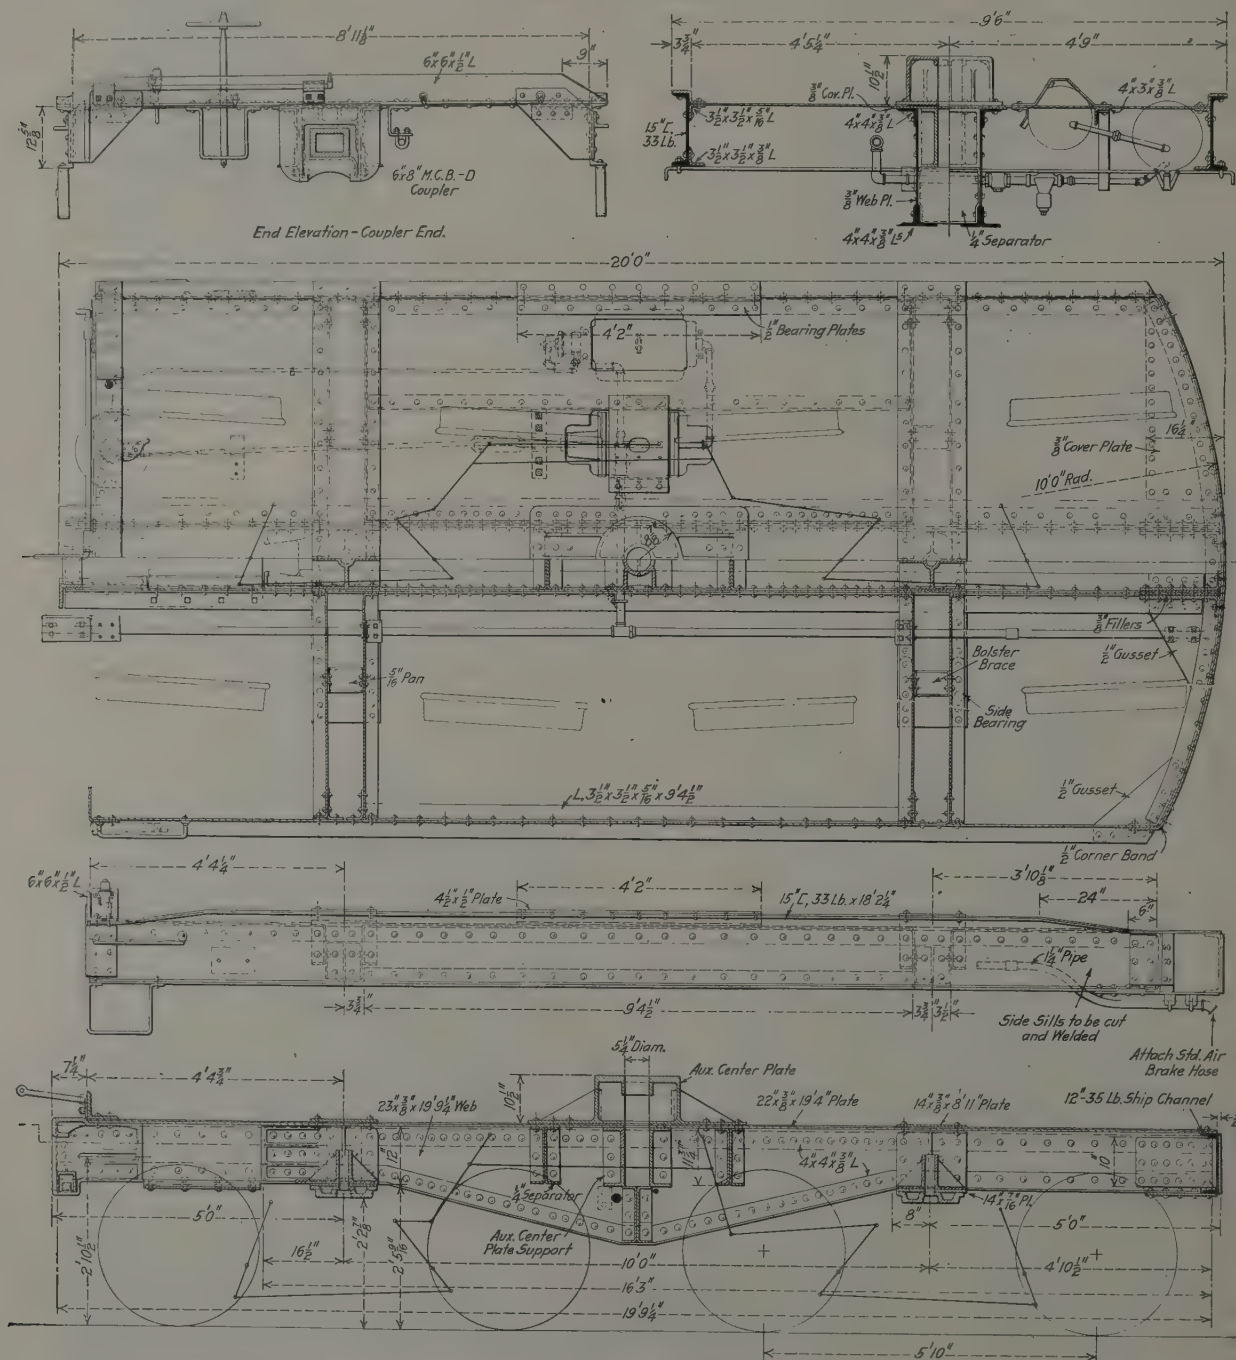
Details of Carrier Units of Naval Gun Car Shown Above.
